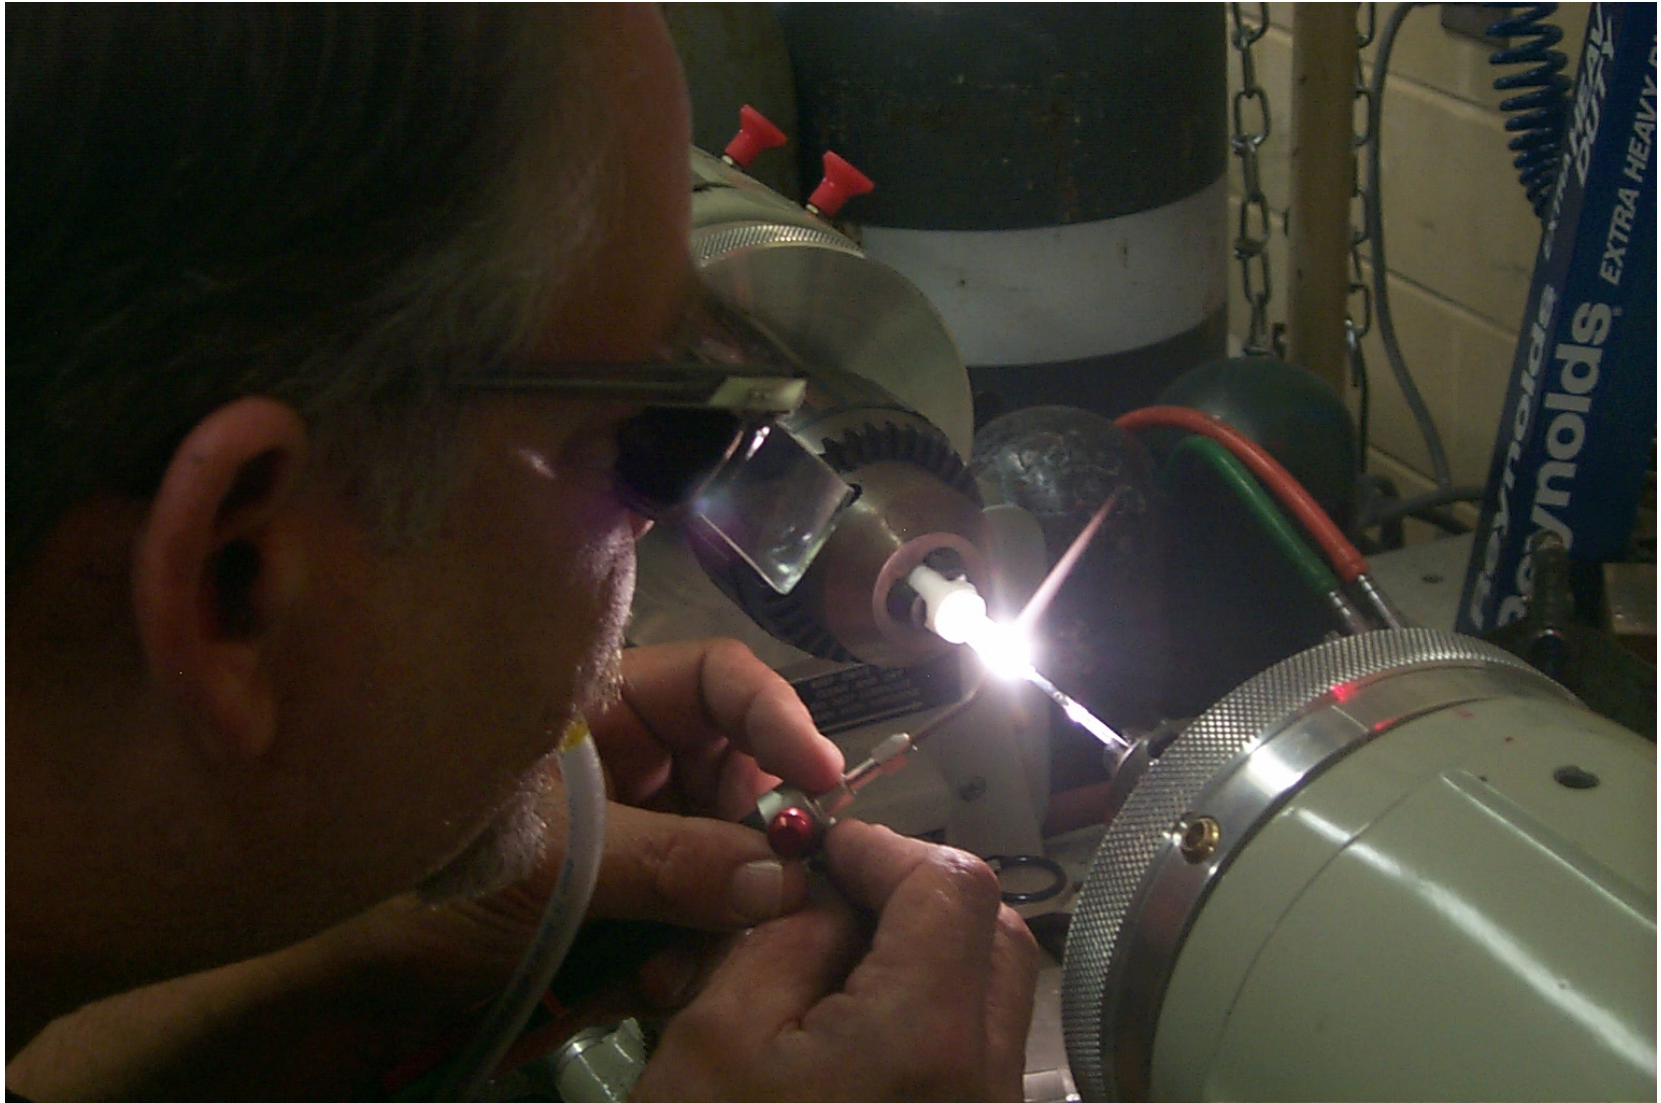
Sealing the center capillary tube to the front plug. The glass blower is shown sealing the center (anode) tube to the front plug. The tube has a 2.0 mm OD and a 0.7 mm ID.
